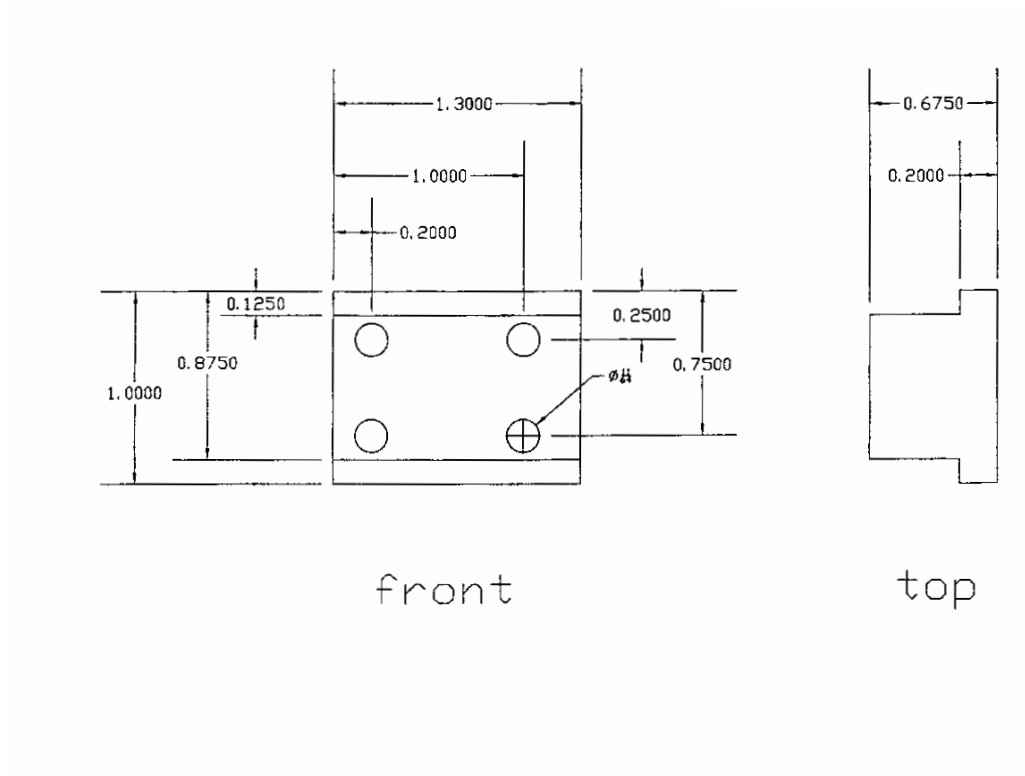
CAD details of the knee plate spacers. They are machined from delrin blocks.
